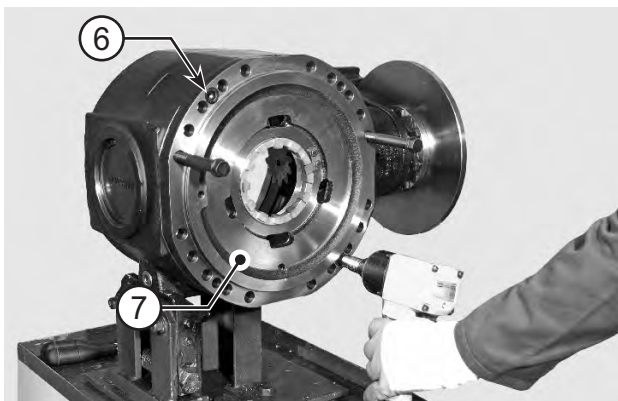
Tighten two safety M16 studs in the main body. Loosen and remove the check screws (6) of intermediate cover (4) on ring gear side.
